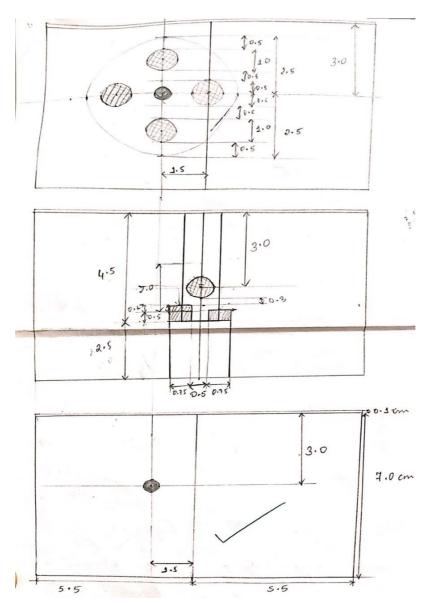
Side View of the Optical Assembly within BCA (Filter wheel, Indicator wheel, and cuvette holder)
